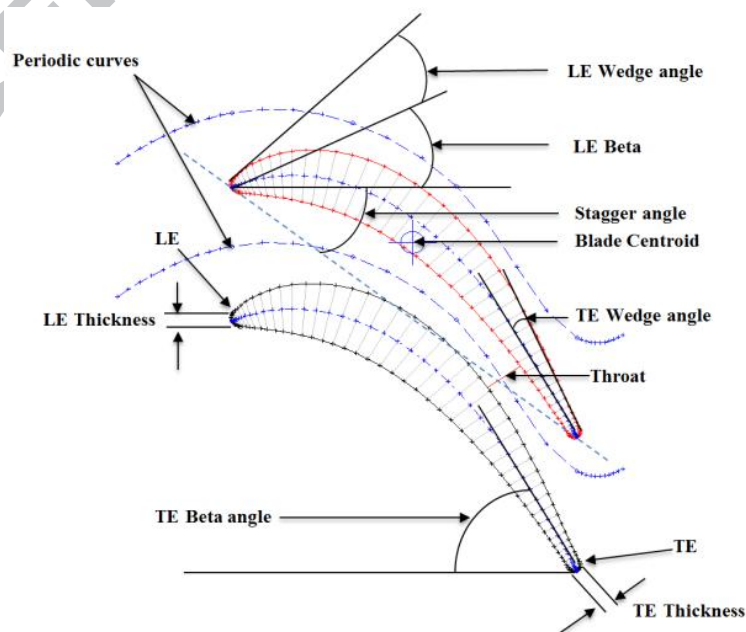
The definition of the dimensions and the angles with Blade-to- Blade view.
